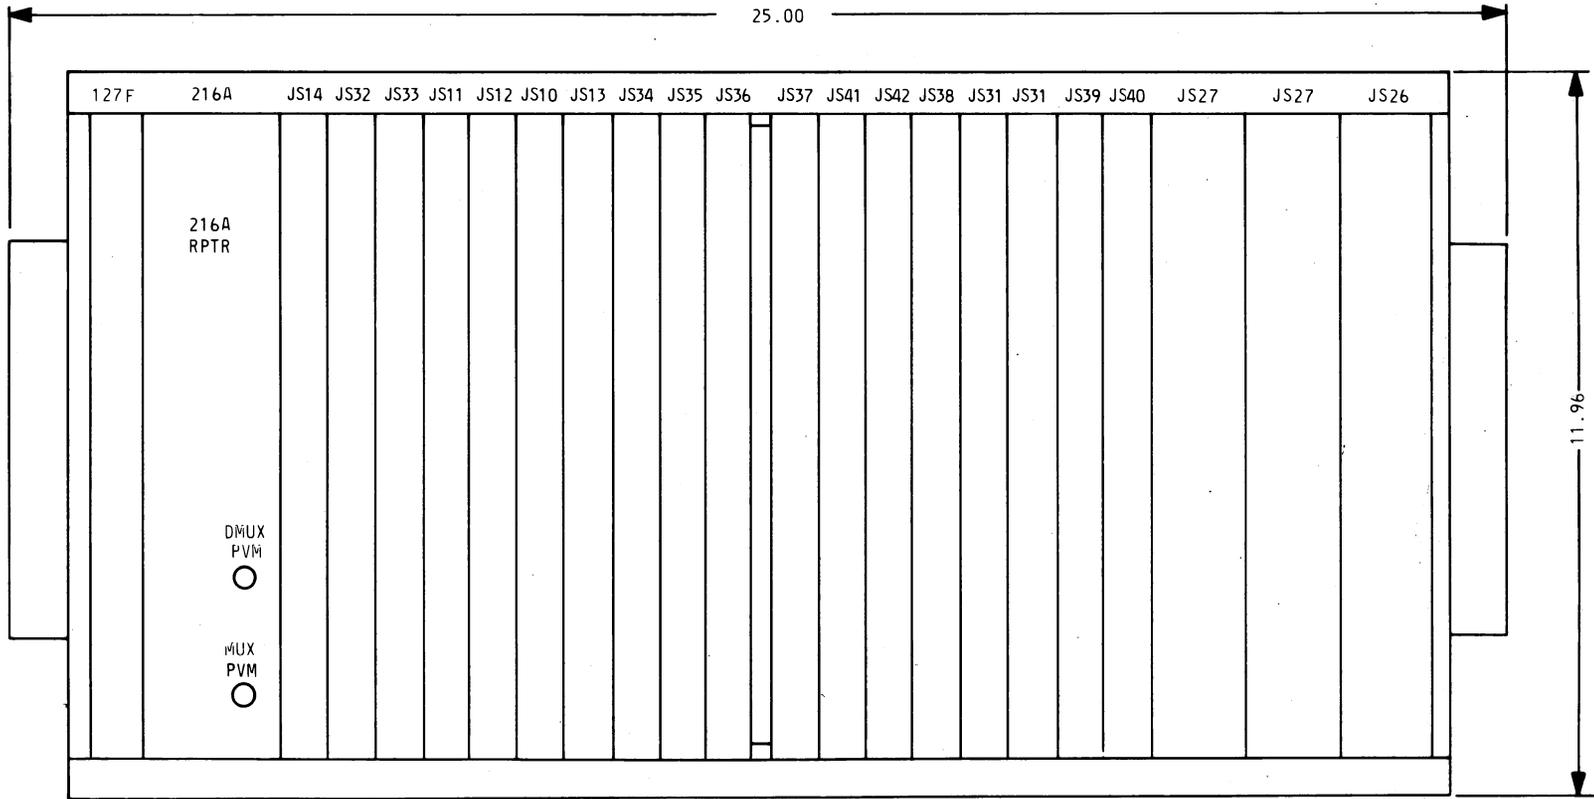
Monitor and Control Shelf Assembly—J98723AG
